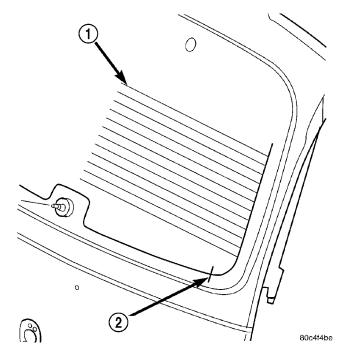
REAR WIPER BLADE/ARM TICK MARK
